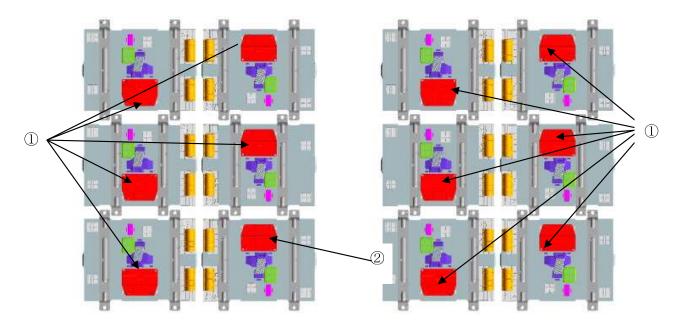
BMS Collector Layout (Underfloor Battery Pack)
